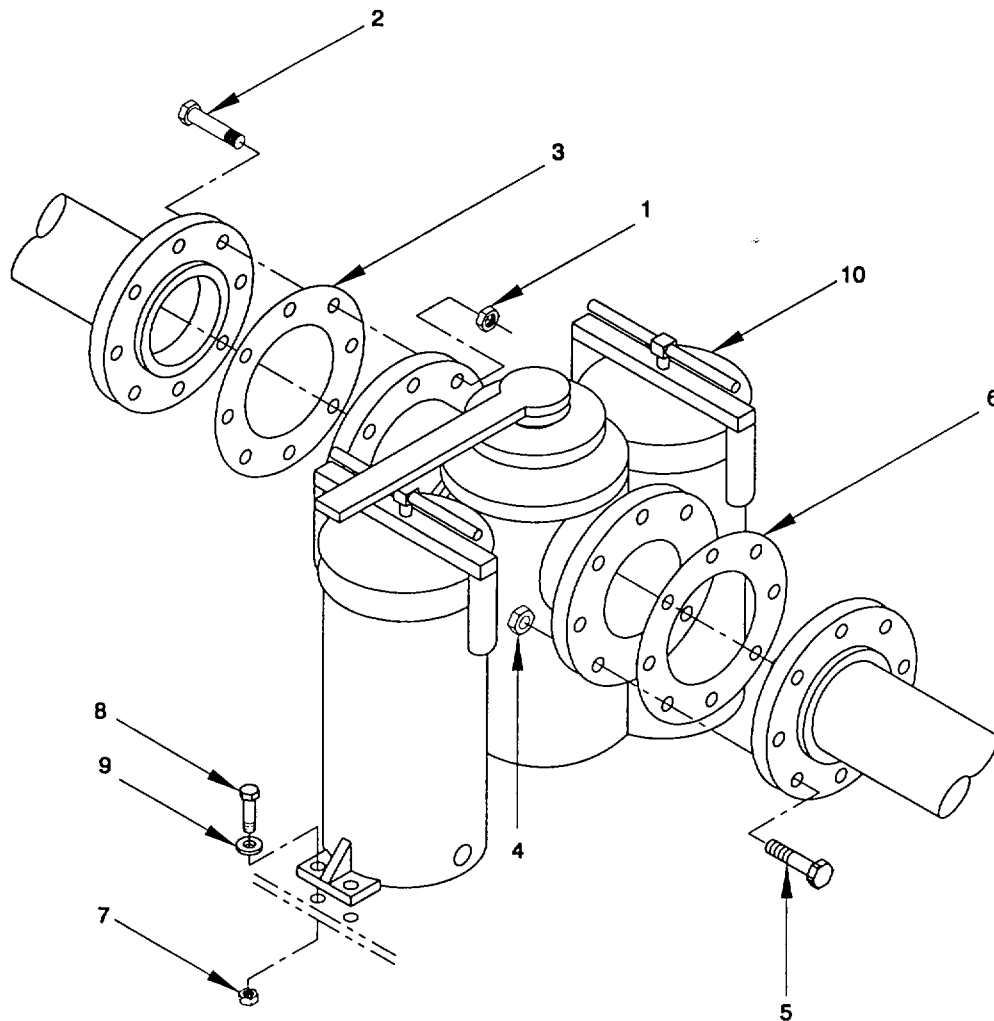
Duplex Strainer, Engine Cooling System, Remove/Install.
